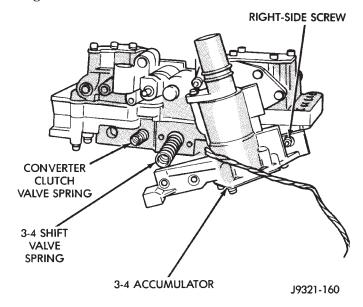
Installing Converter Clutch And 3-4 Shift Valve Springs—46RH
